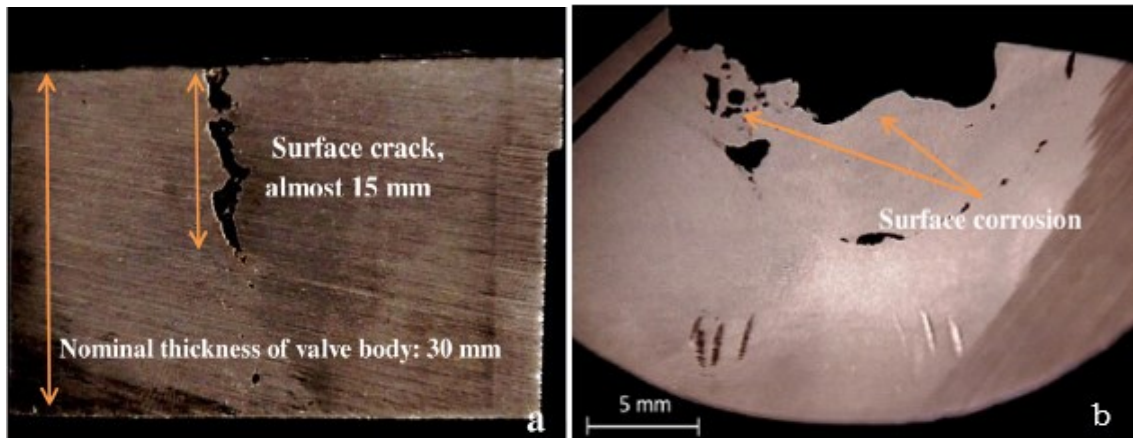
Corrosion cracks of the valve body base metal after 36 months of exposure in sour environment (H_2S rich) (a) initiation of cracks from inner surface of the valve's surface (b) surface corrosion cracks at the valve's flange. [28]
